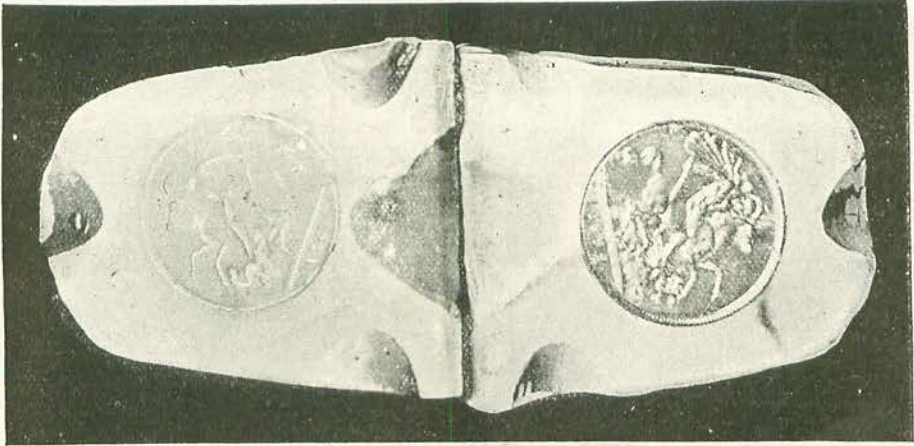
MOULD FOR FIVE-SHILLING PIECE.
